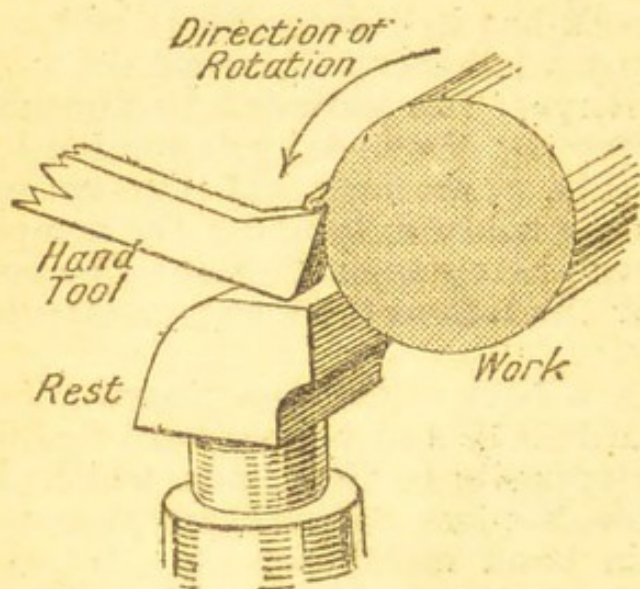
Showing how a hand tool cuts the metal, the former being held on a rest
